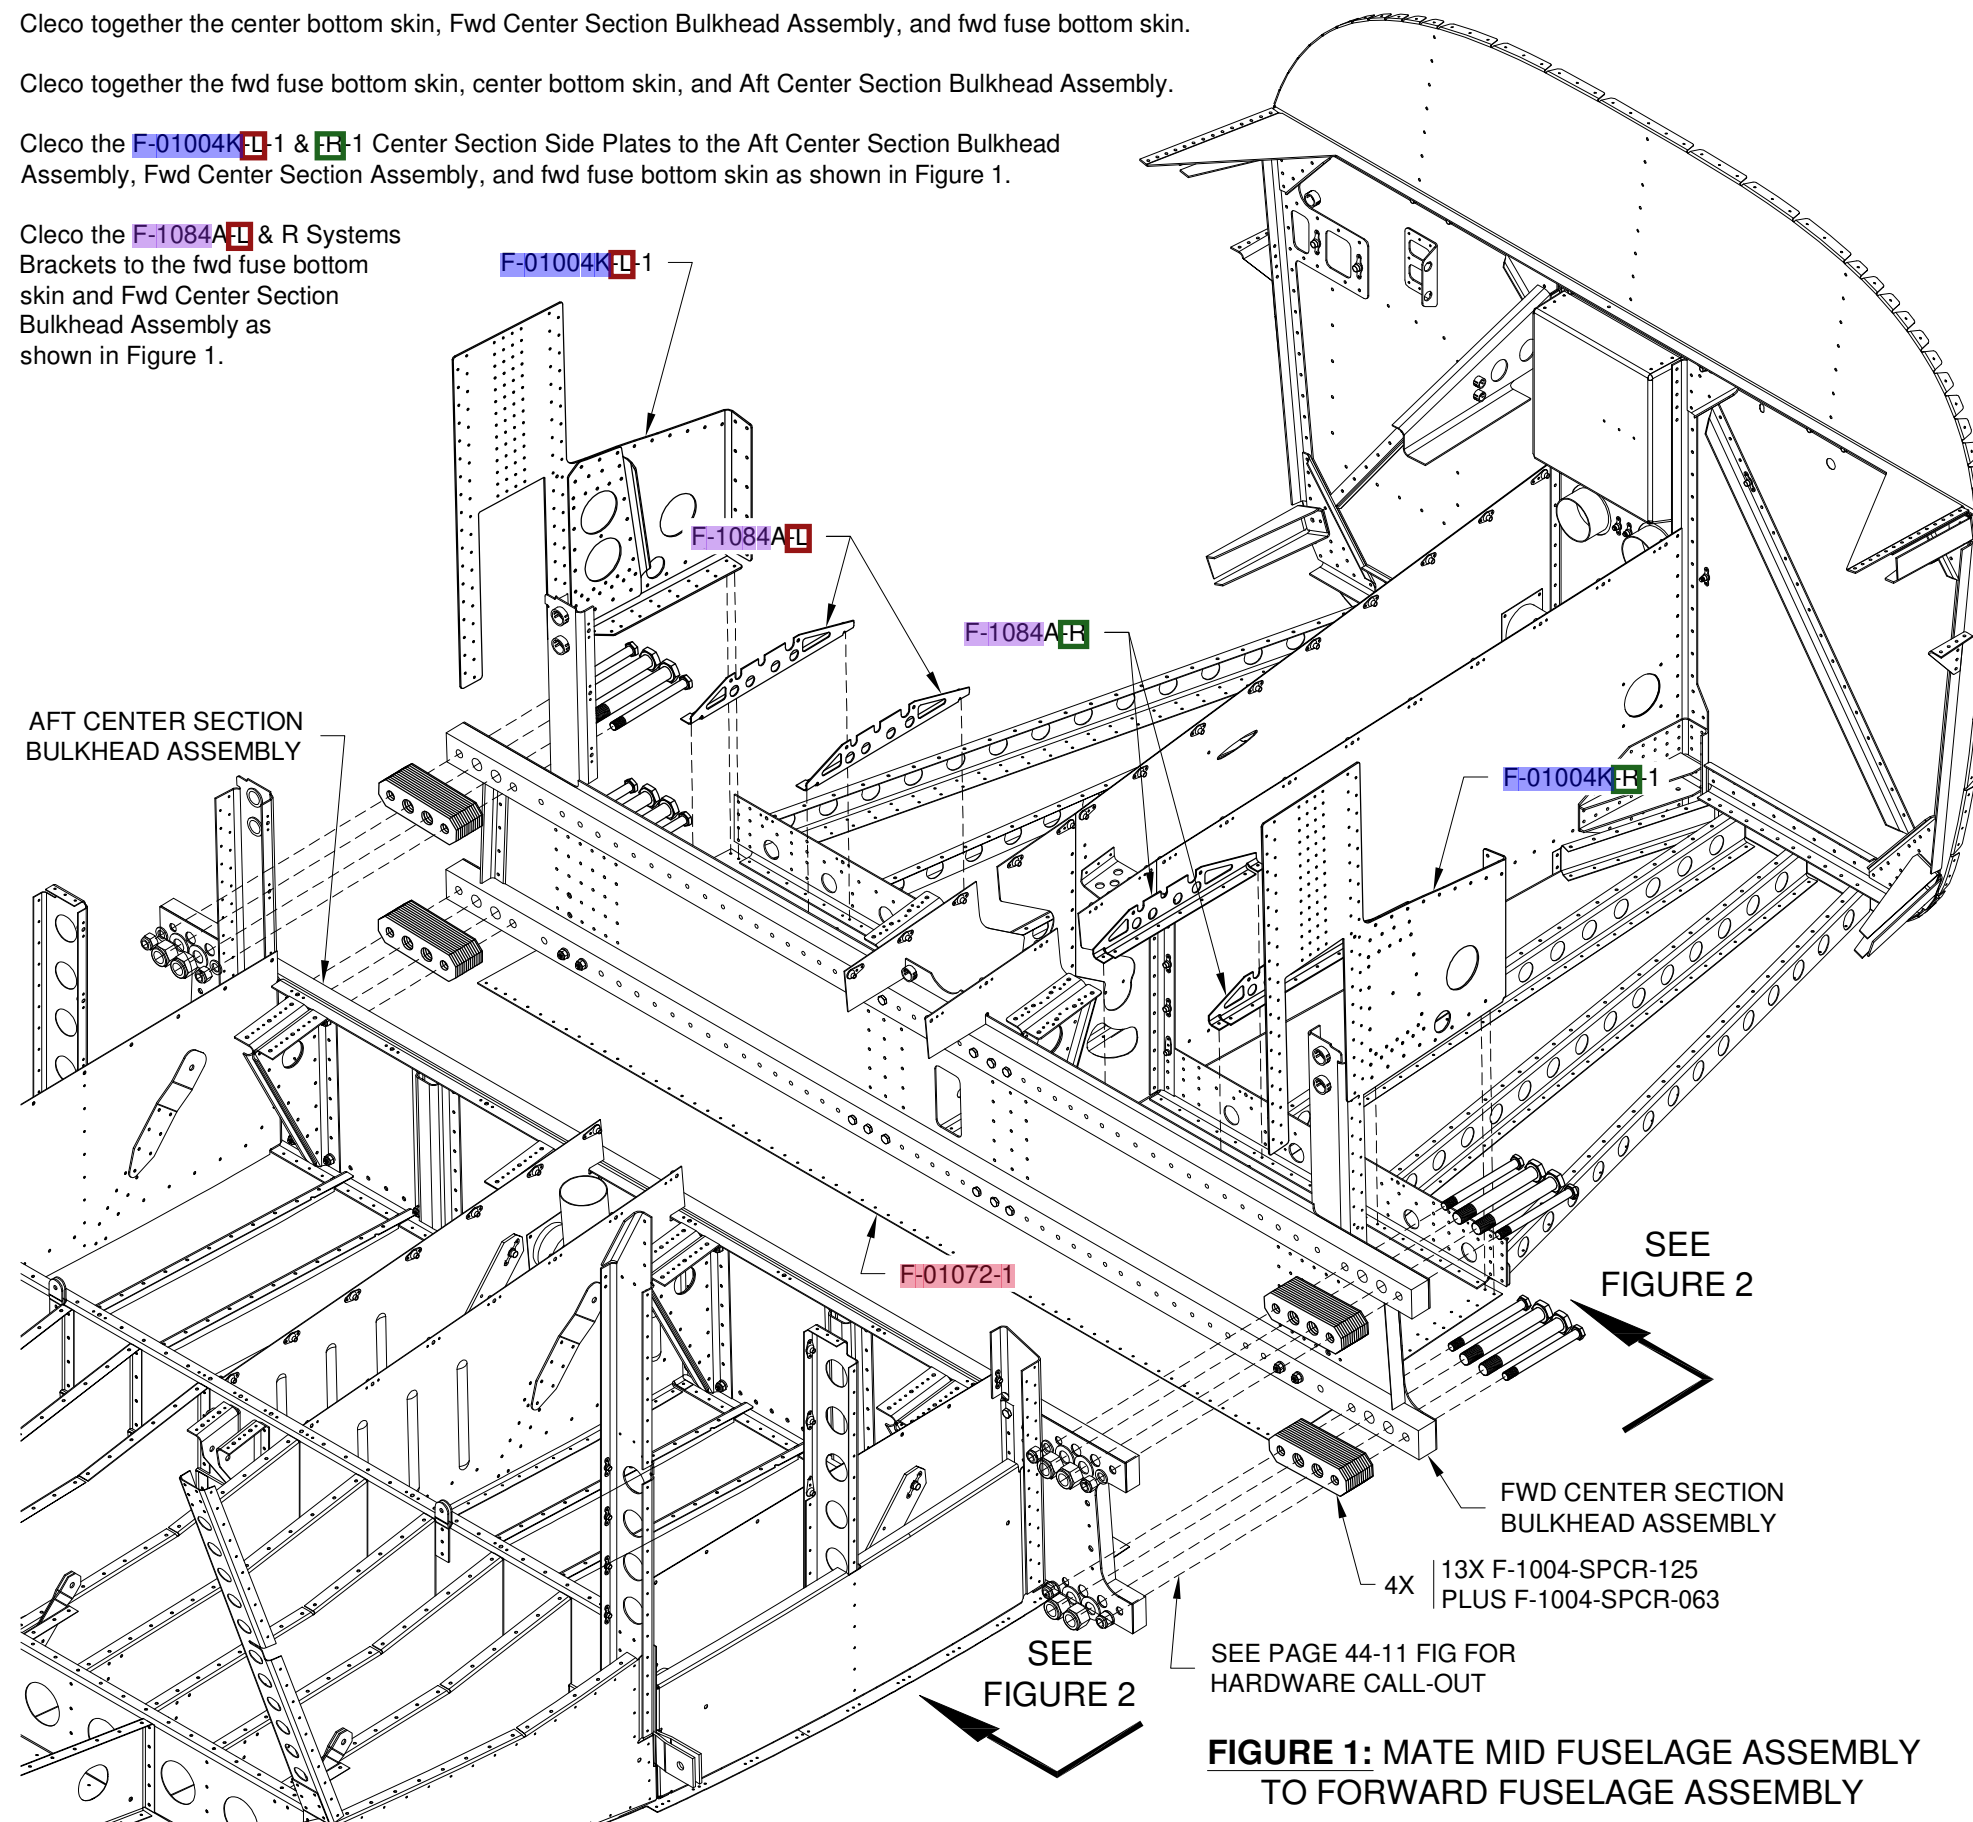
MATE MID FUSELAGE ASSEMBLY TO FORWARD FUSELAGE ASSEMBLY
